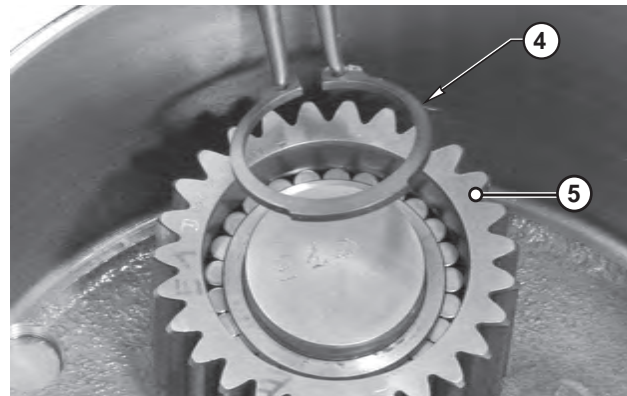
Remove the planetary gear (5) snap rings (4).
